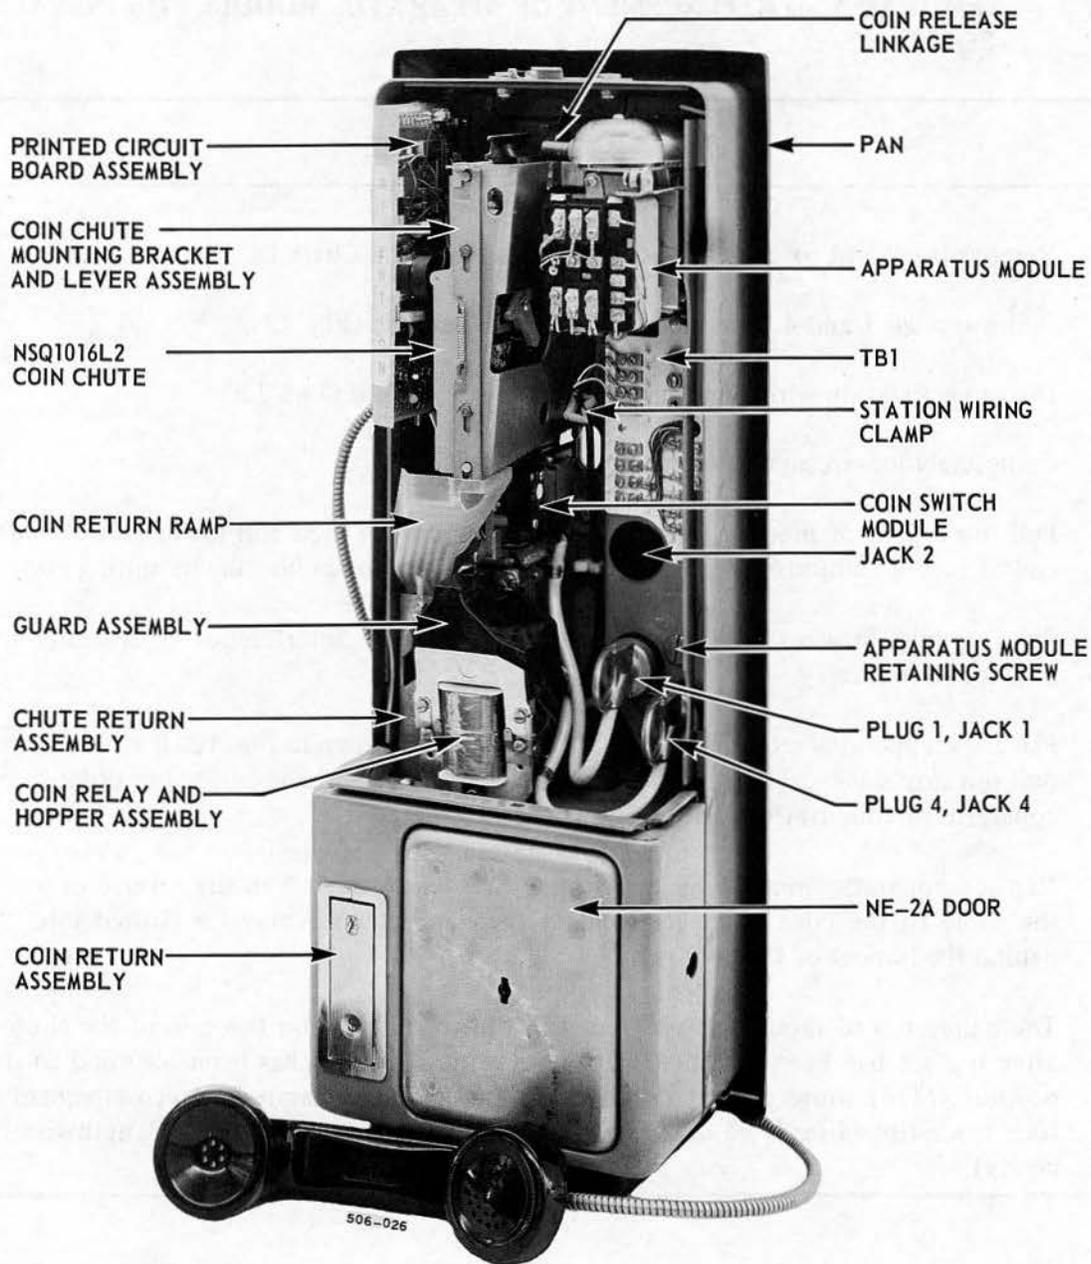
QSD400A1 and QSD2400A1 Coin Telephone Set Hood and Cover Unit Assembly Removed
